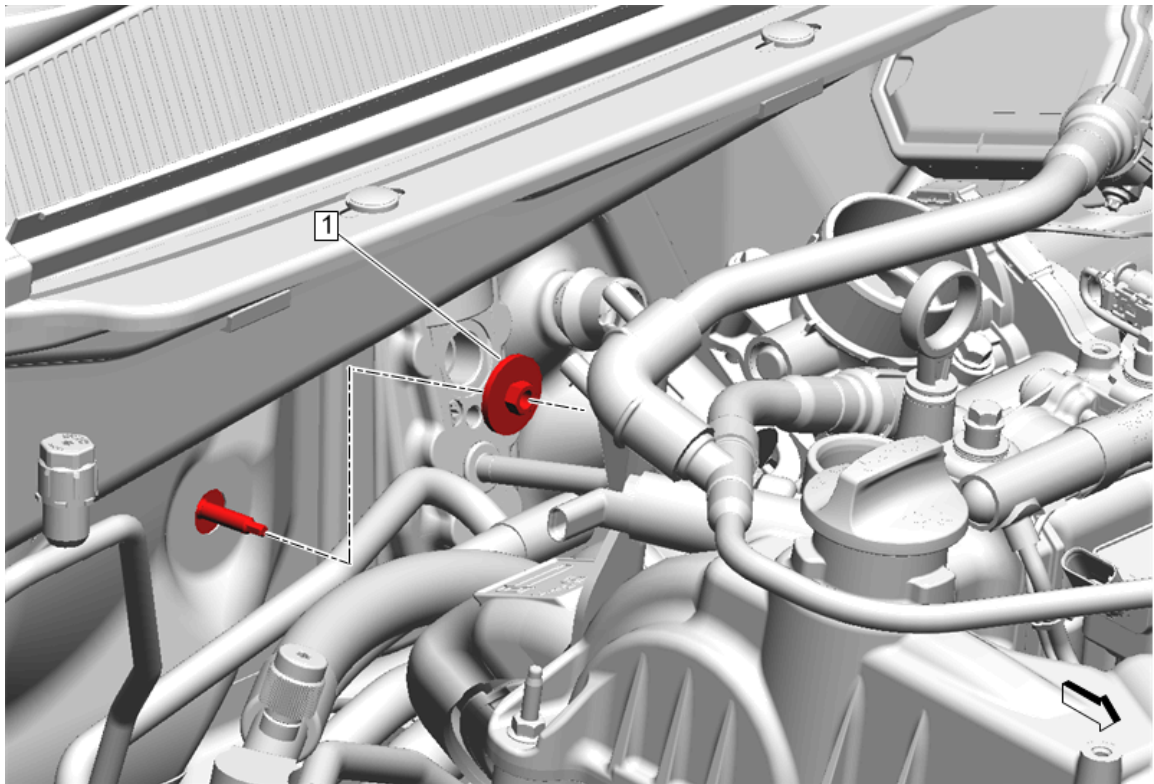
Heater And Air Conditioning Evaporator And Blower Module Nut
